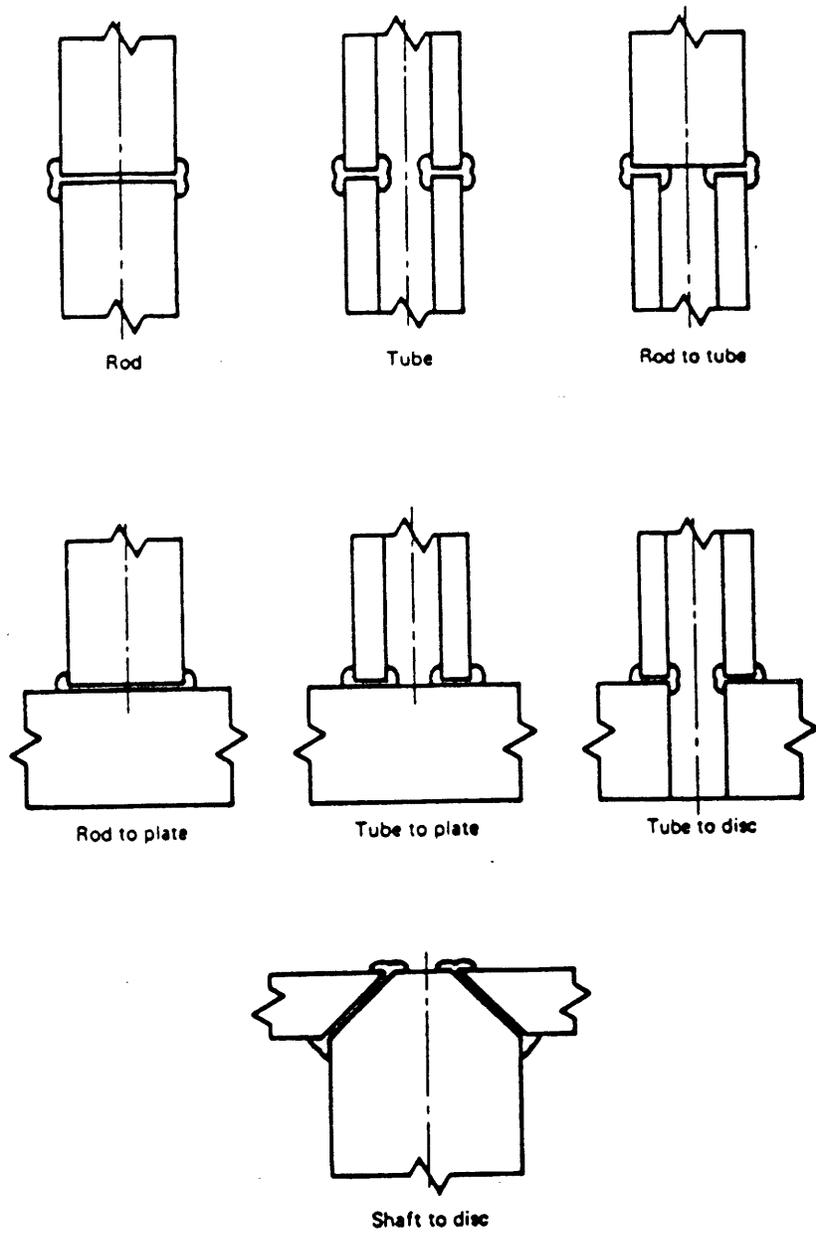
Typical Friction Weld Joint Design [26]
